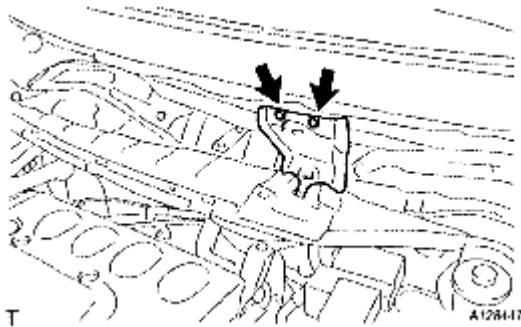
Locating Cowl Top To Cowl Inner Brace
